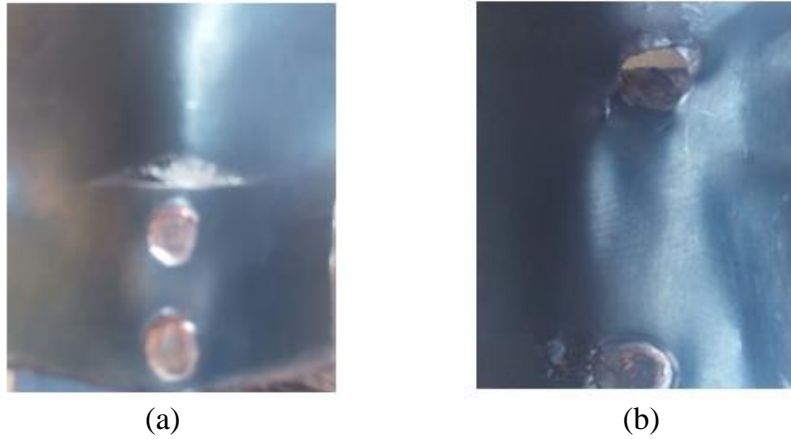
Location of failure mode, (a) welding, (b) Top Button pull-out
